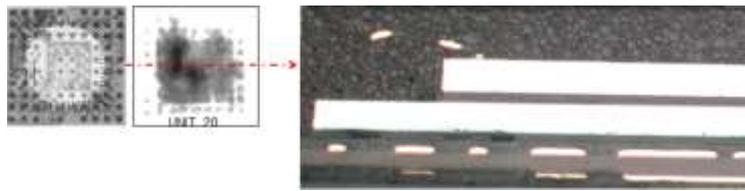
MSL3 passed on assembly package performed using softer and thicker DAF for Die2
